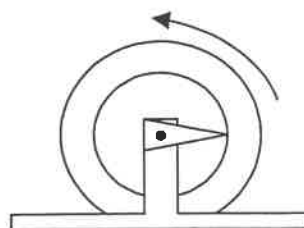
Boring operation with a fixed tool and rotating workpiece.
